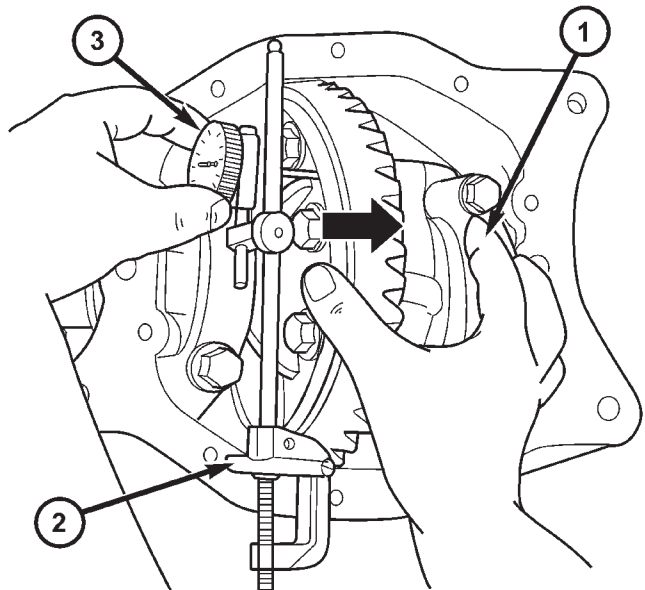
SEAT DUMMY BEARING RING GEAR SIDE
